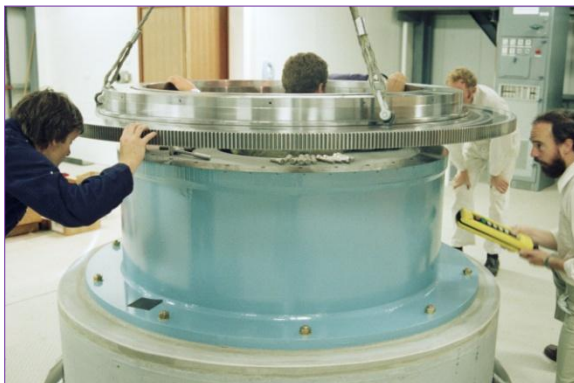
Mounting of the azimuth bearing and ring gear in preparation for installation of the telescope fork.
